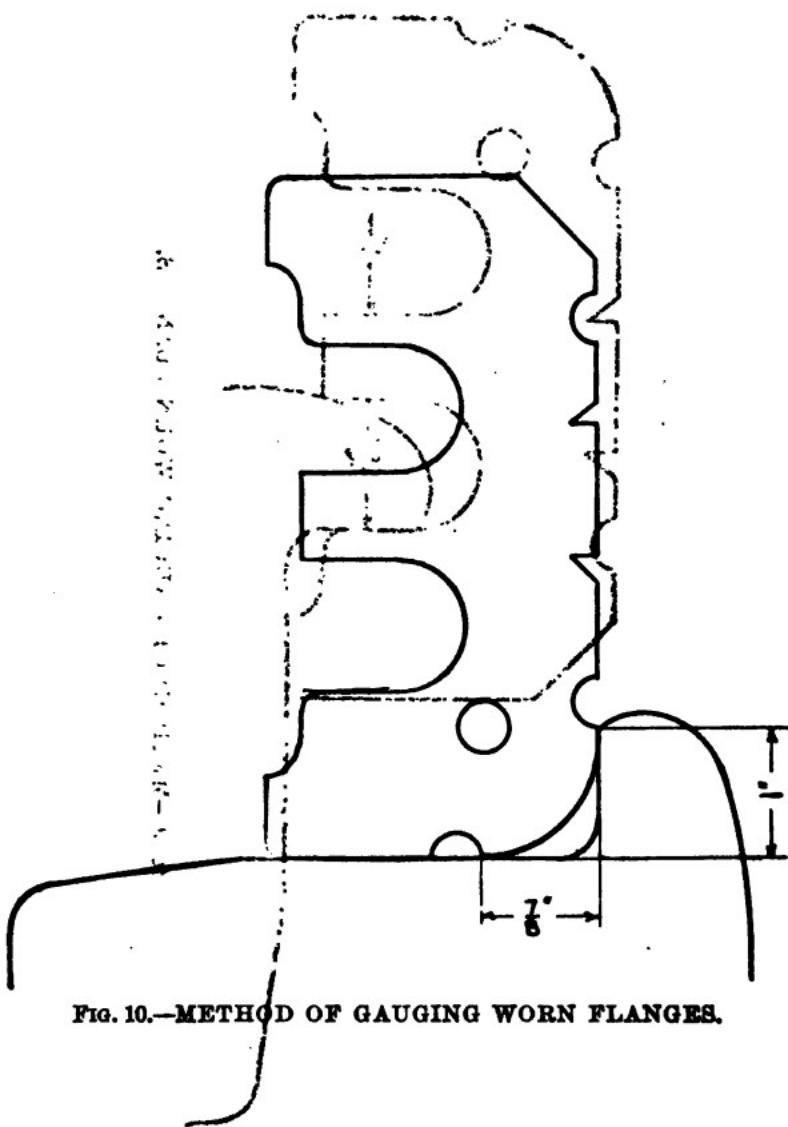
METHOD OF GAUGING WORN FLANGES.
